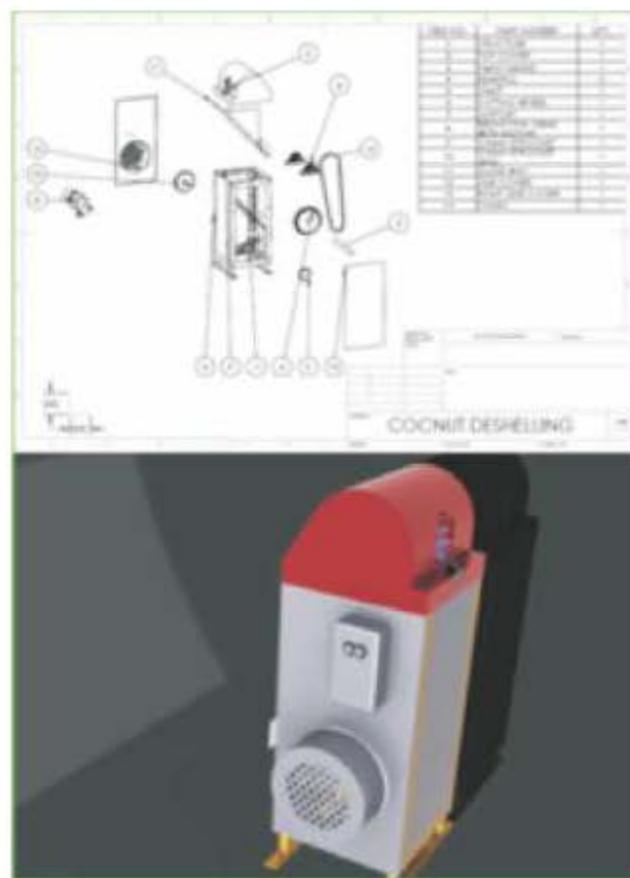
Coconut de-shelling machine- engineering drawing and animation
